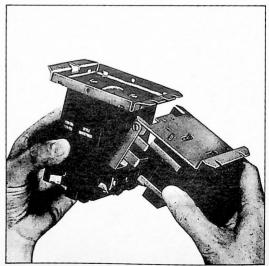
Assembly and Installation of Latched A/200 Contactors
